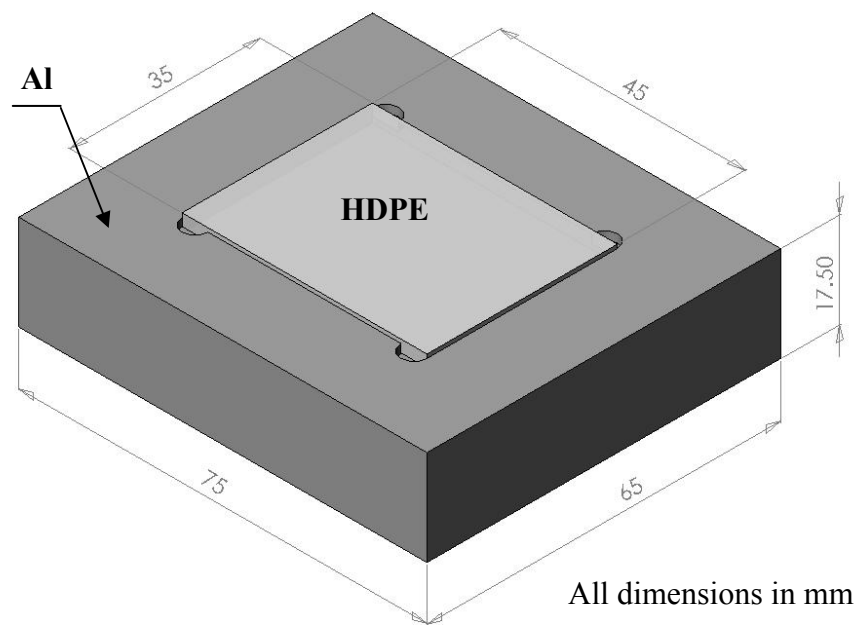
HDPE set in aluminum block for micromilling prototype
